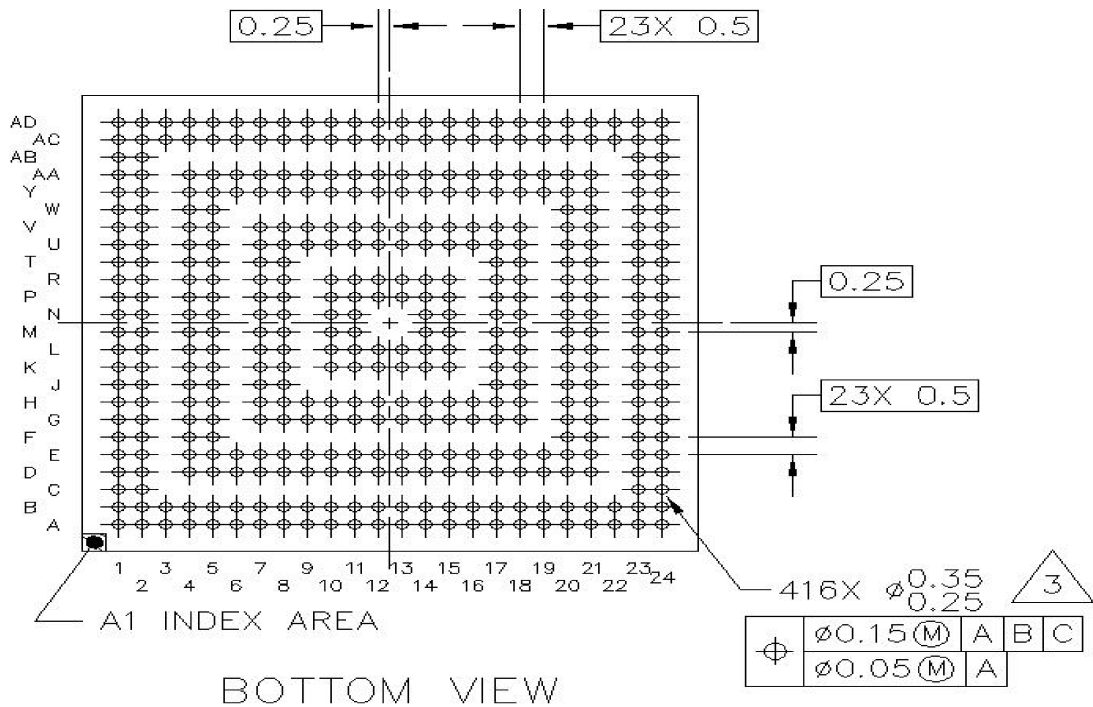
416 PoPBGA 13 x 13 mm Package Bottom View
